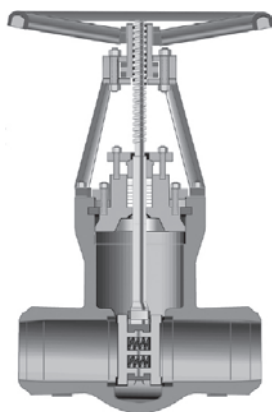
B-S Parallel Slide Disc, Butt Weld Ends
